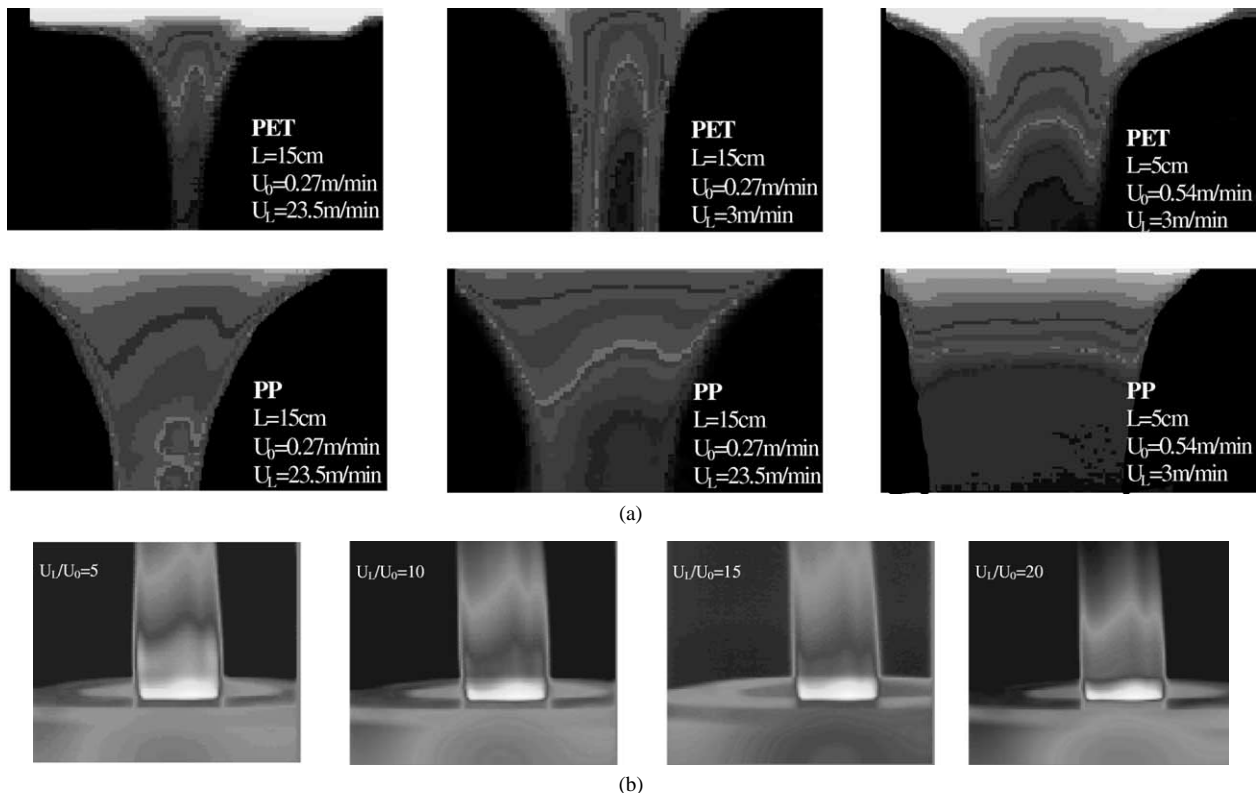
(a) Pet and pp film casting extrusions; (b) Pet bubble extrusions.
